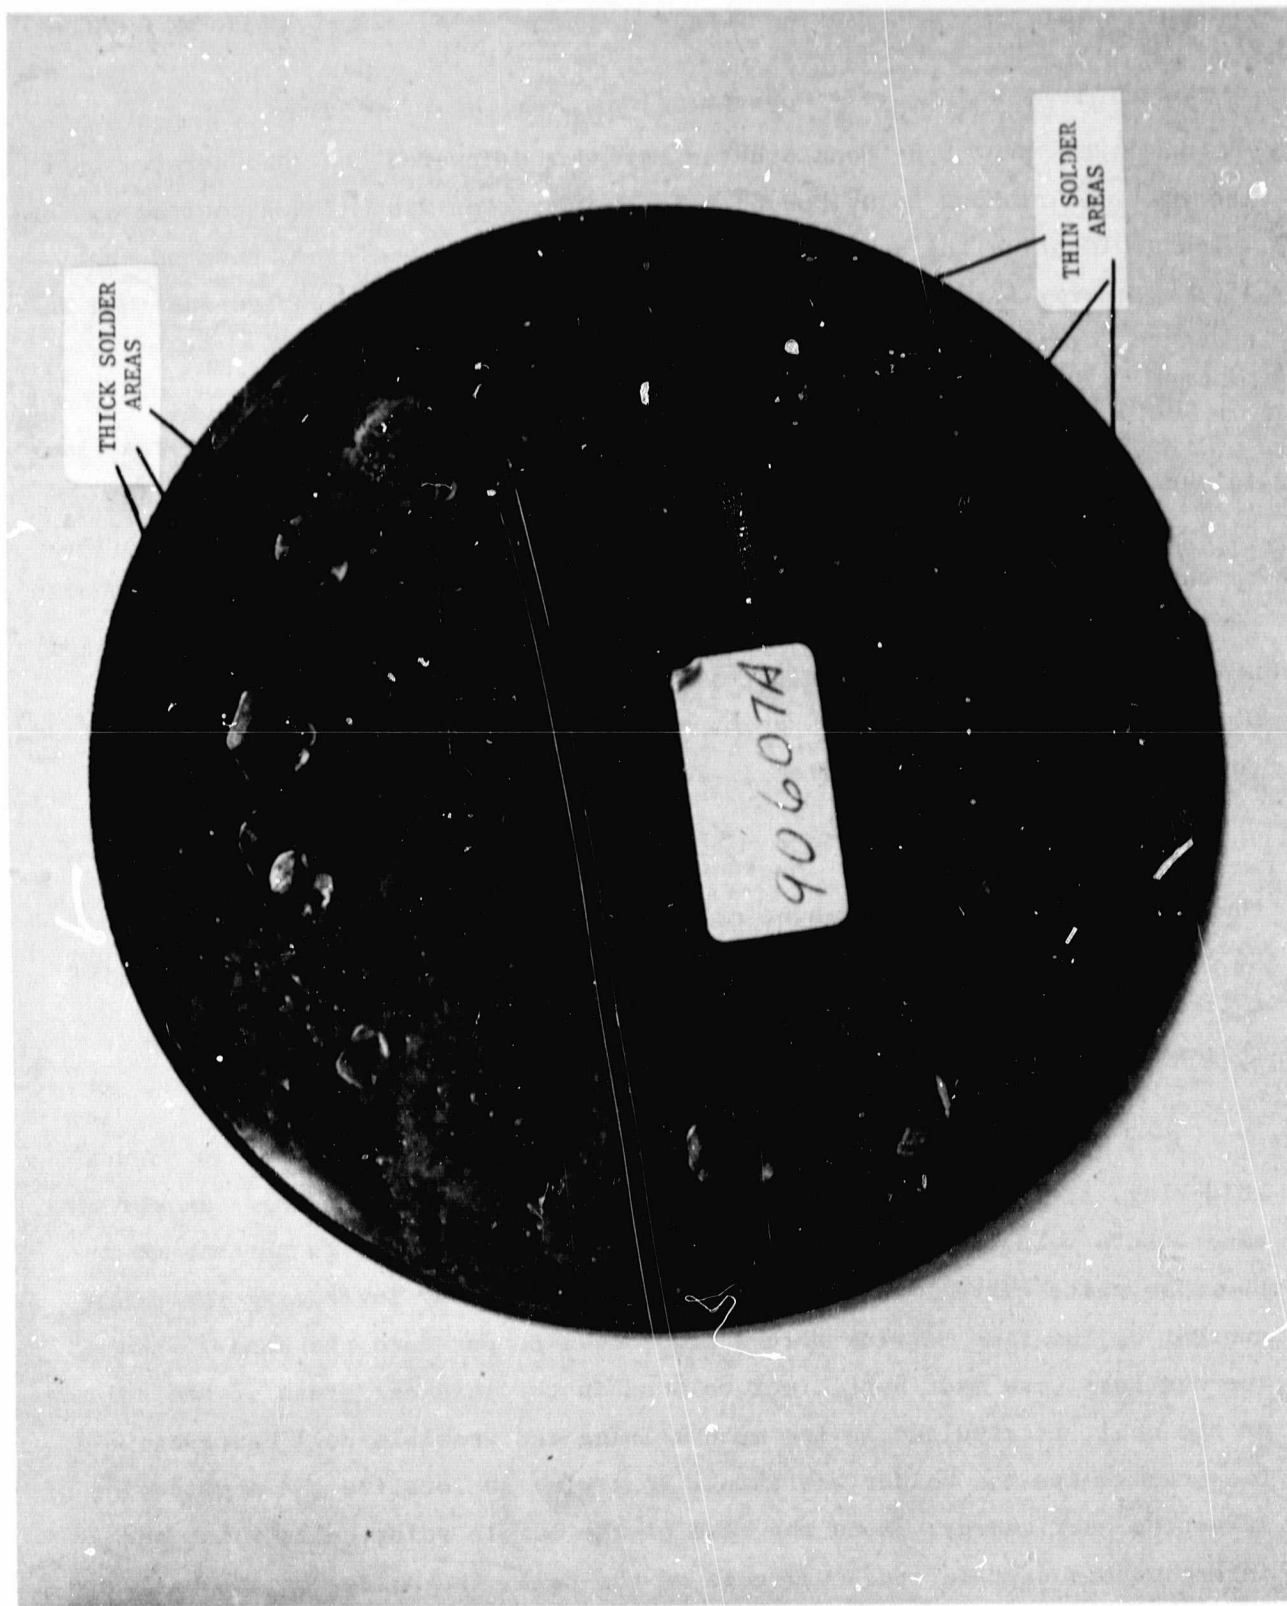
SAMPLE INDUCTION HEAT MELTING IMPRINTS ON SOLDER-BACKED CELL
